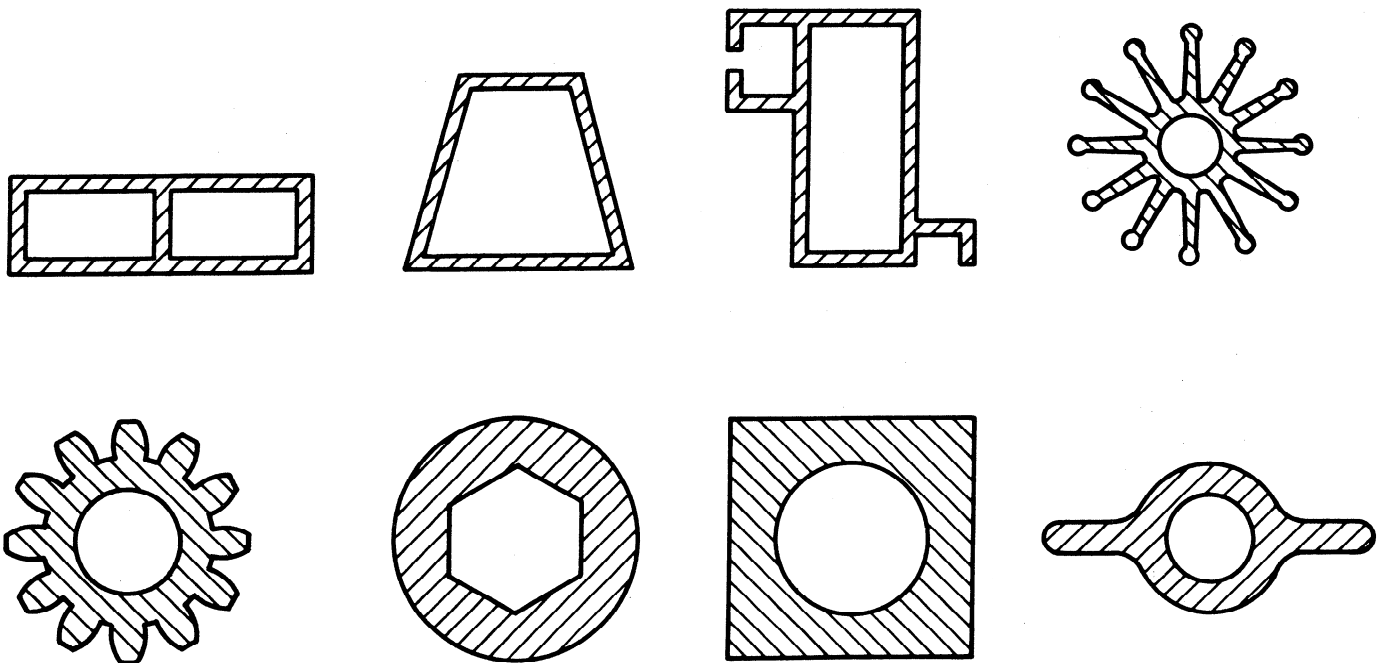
Hollow profile cross-sections/ Figure 4 — Sections transversales des profilés creux/
